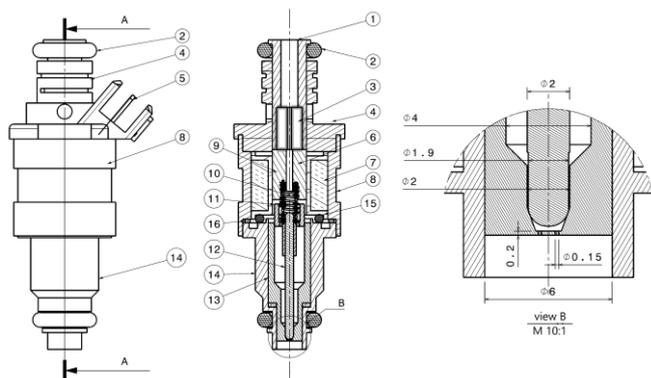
General layout of a electromagnetic gasoline injector: 1-Inlet port; 2-O-ring; 3-Filter; 4-Cover; 5-Terminal; 6-Coil holder; 7-Coil; 8-Upper Housing; 9-Armature; 10-Spring; 11-Guide; 12-Needle; 13-Camera; 14-Lower Housing; 15-Internal O-ring; 16-Spacer Washer
